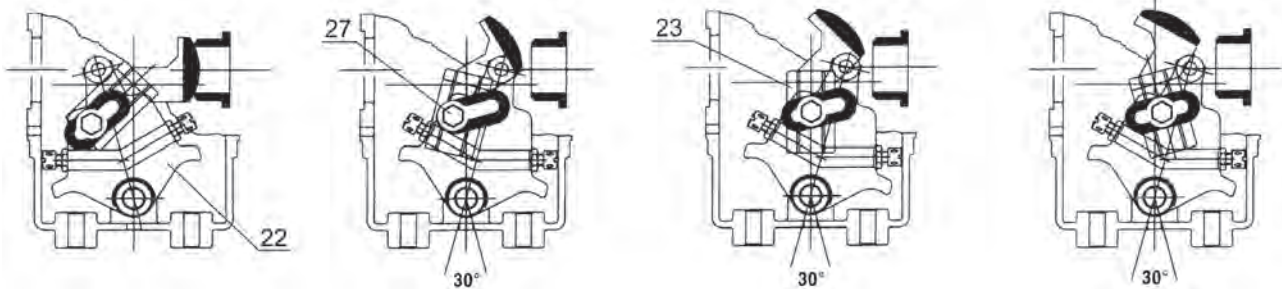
Bearing pin (27) position on lever (22) regarding crankshaft (23) (valve shaft - Kvs) rotation angle.
